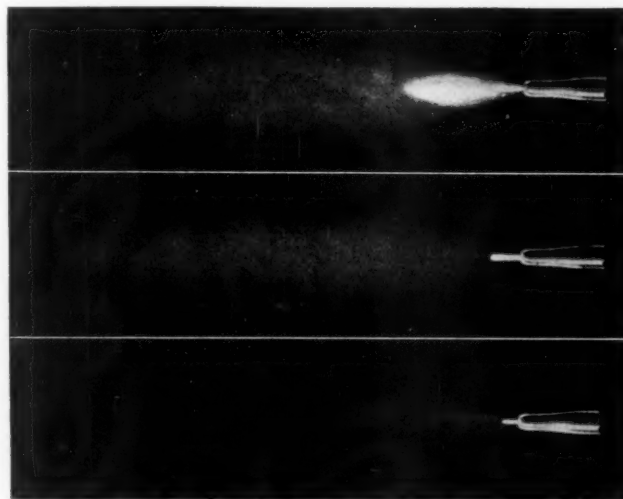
THE THREE TYPES OF OXYACETYLENE FLAMES
